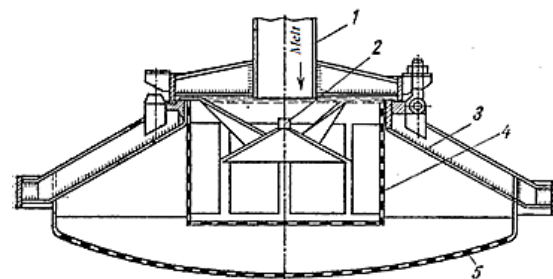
Static priller: 1 – supply nozzle; 2 – guide cone; 3 – priller casing; 4 – filter screen
